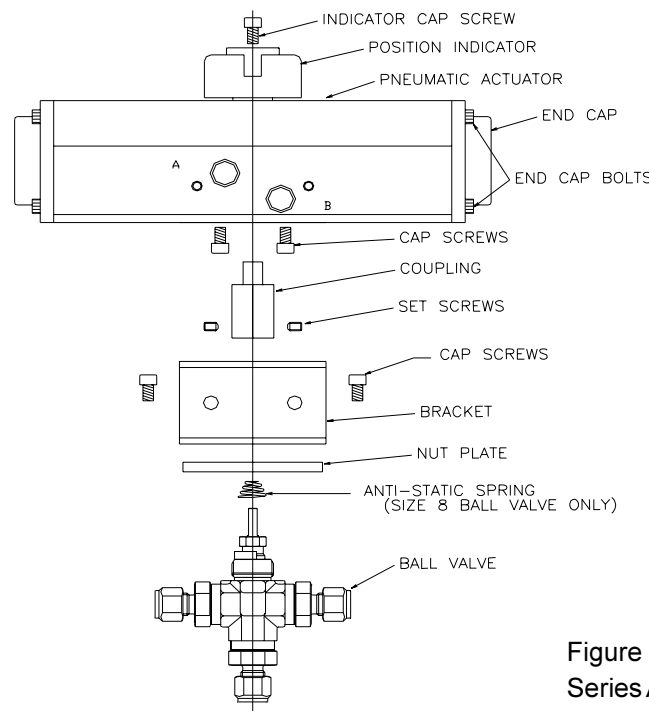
BX Series Valve with 60 Series Actuator Exploded View
